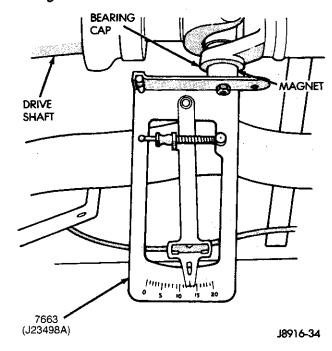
Drive Pinion Gear Shaft Angle Measurement
